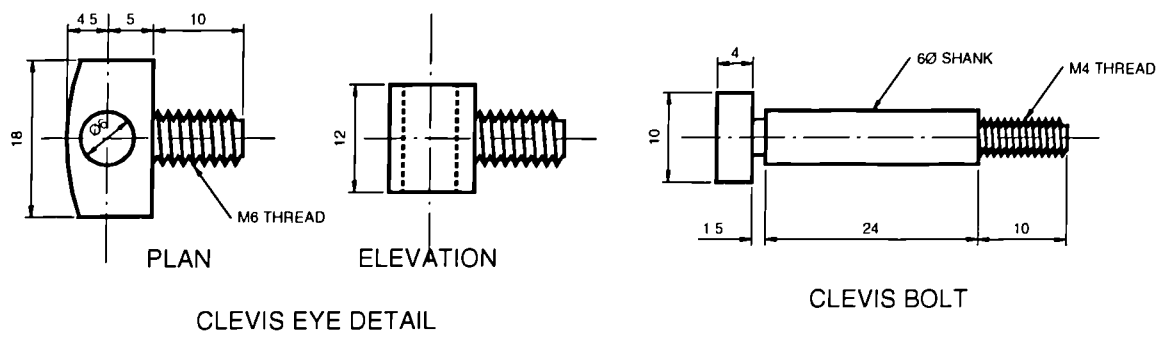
Detail of clevis eye and pin used to connect waling to hydraulic piston
